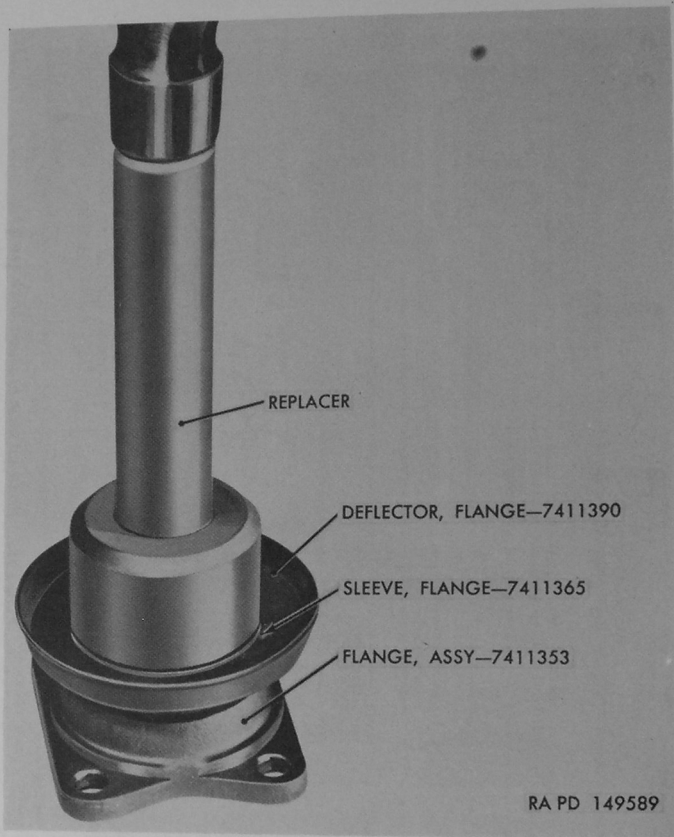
Installing flange oil seal sleeve with replacer 41-R-2395-528.
